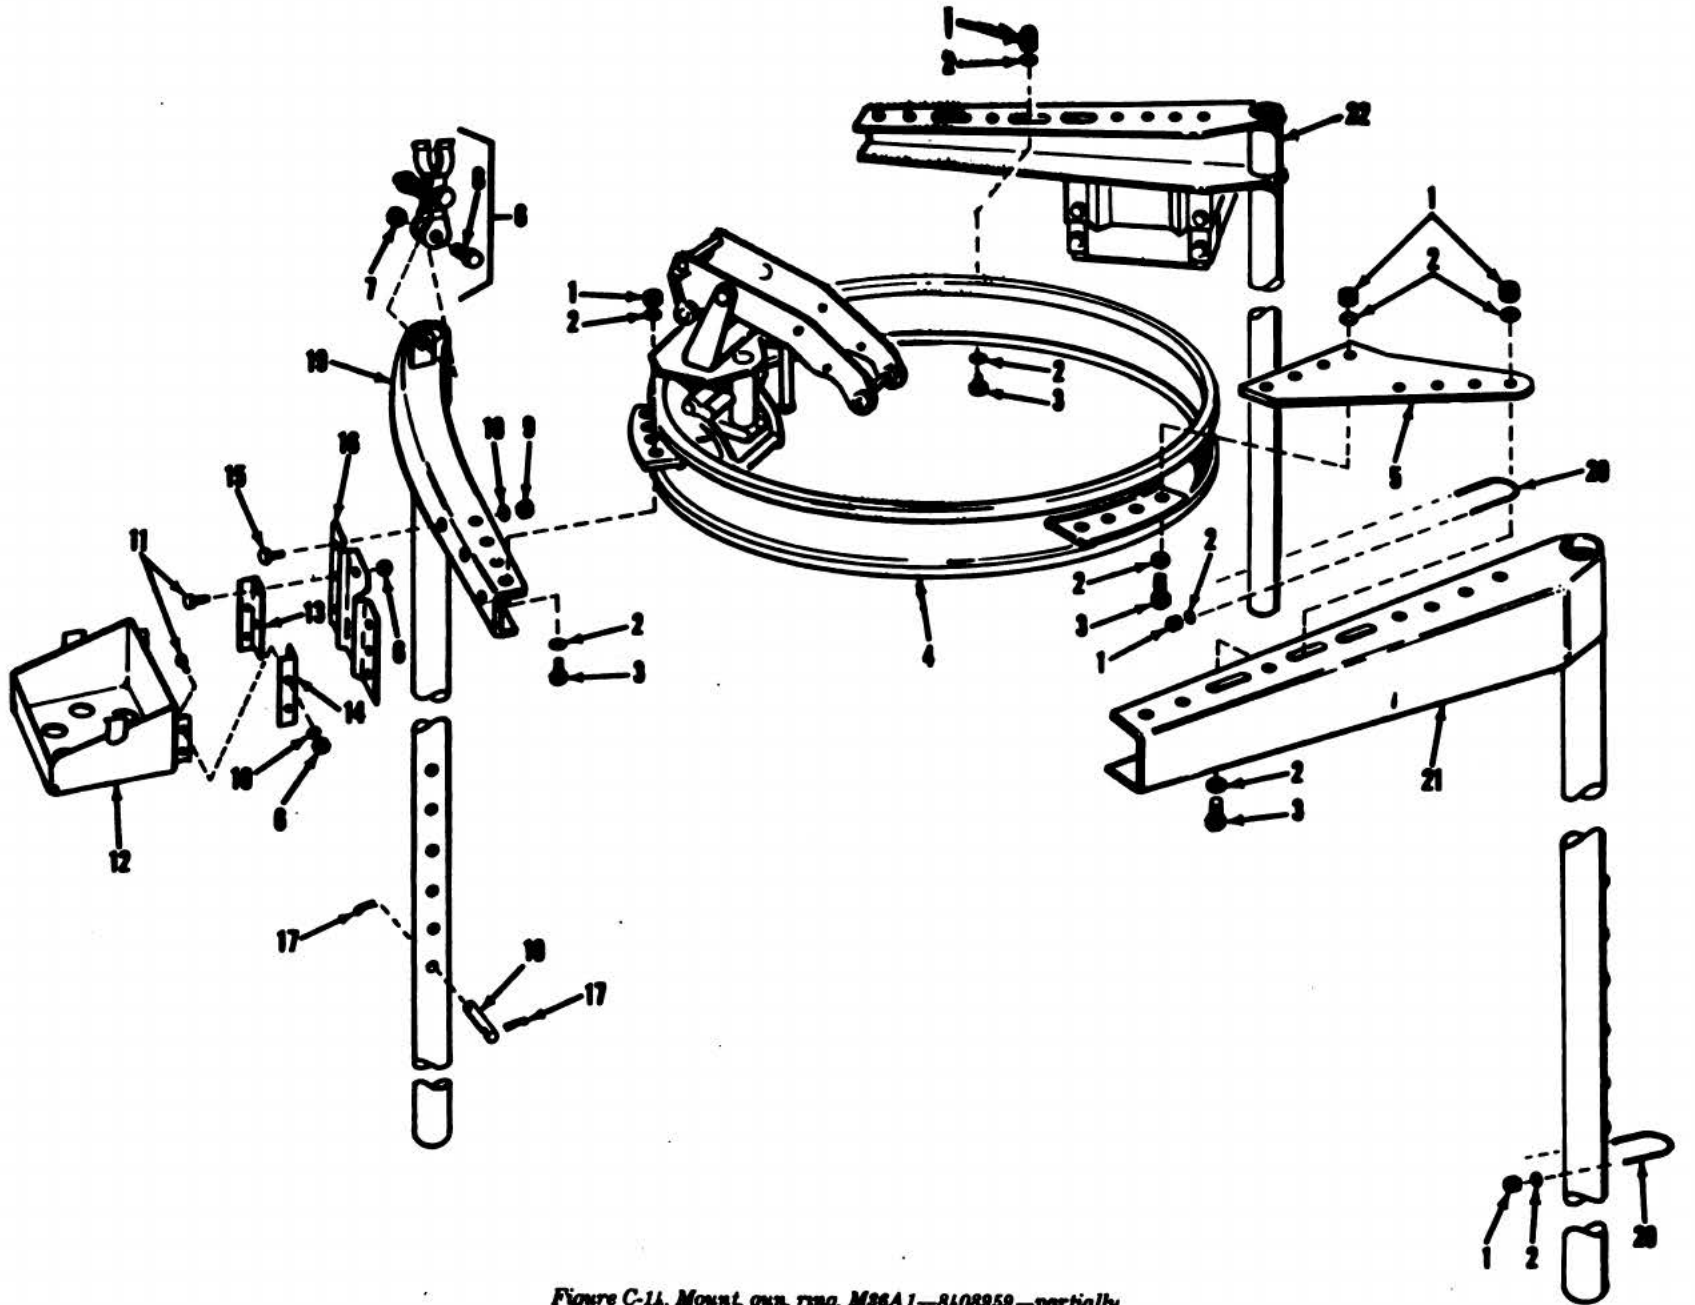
Mount, gun, ring, M98A1-8408959—partially exploded view.
